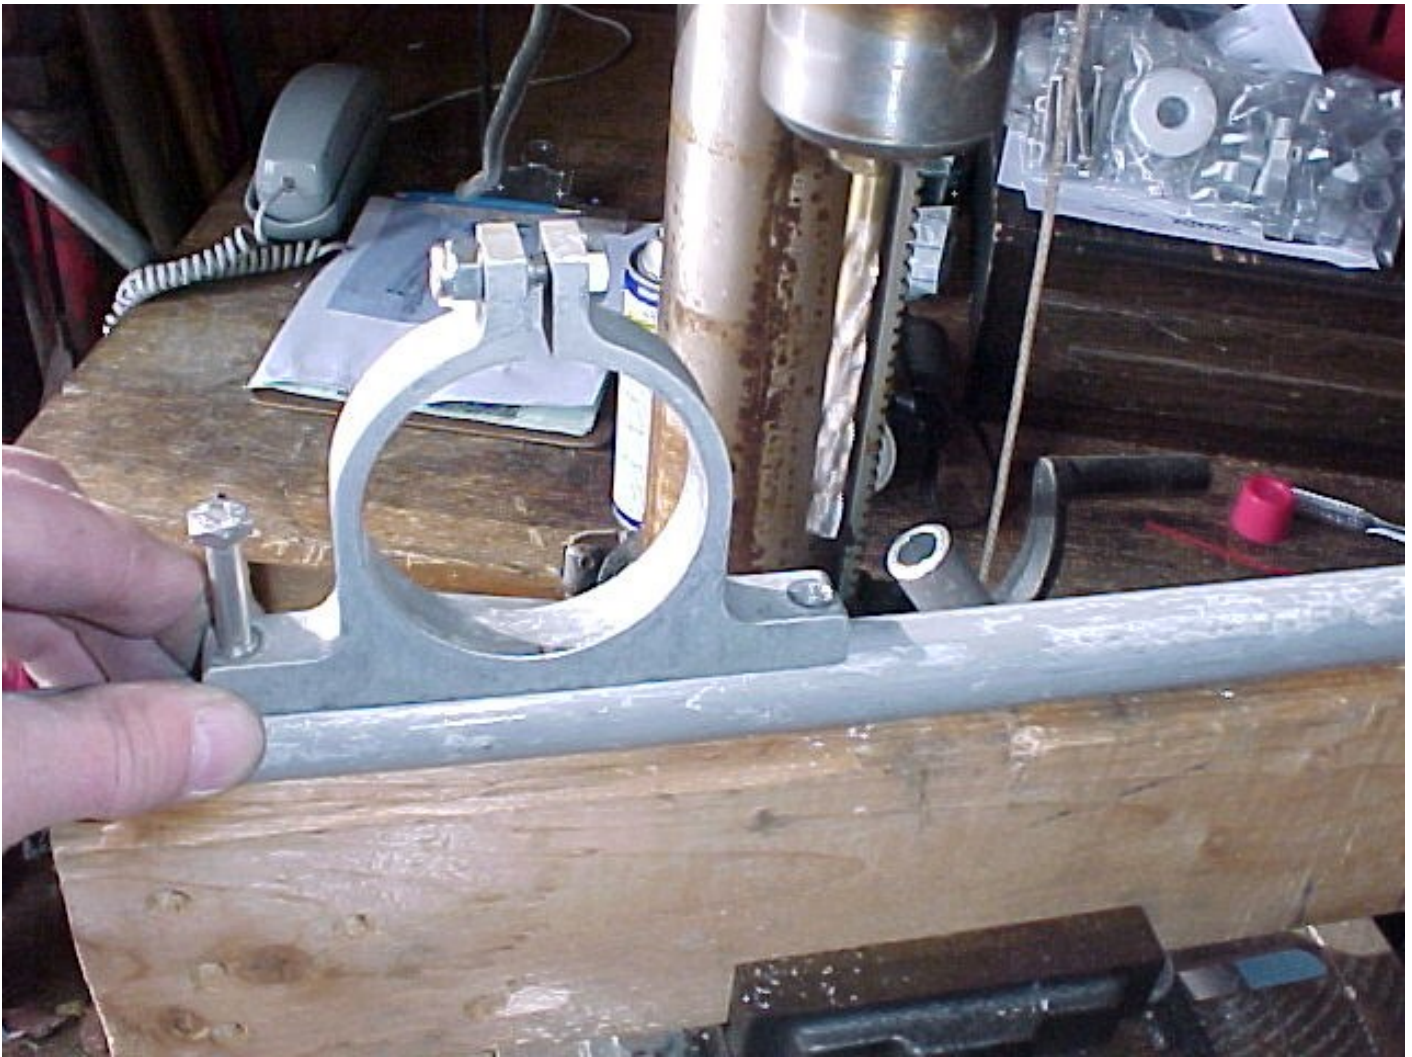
The second hole was lined up by putting a bolt in the first one and using an old boom-element clamp as a guide.
